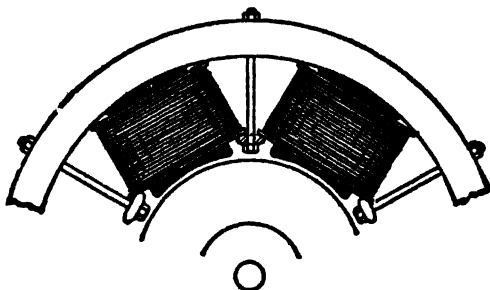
Method of securing coils in position when the pole pieces are simple extensions of the core without enlargement.
